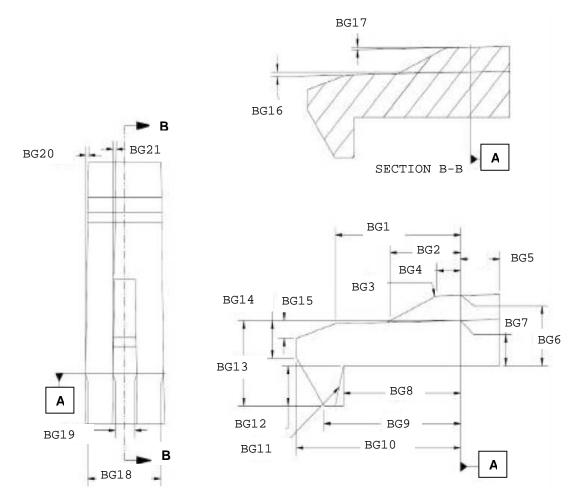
SNAP 3 CANTILEVER CONNECTOR
